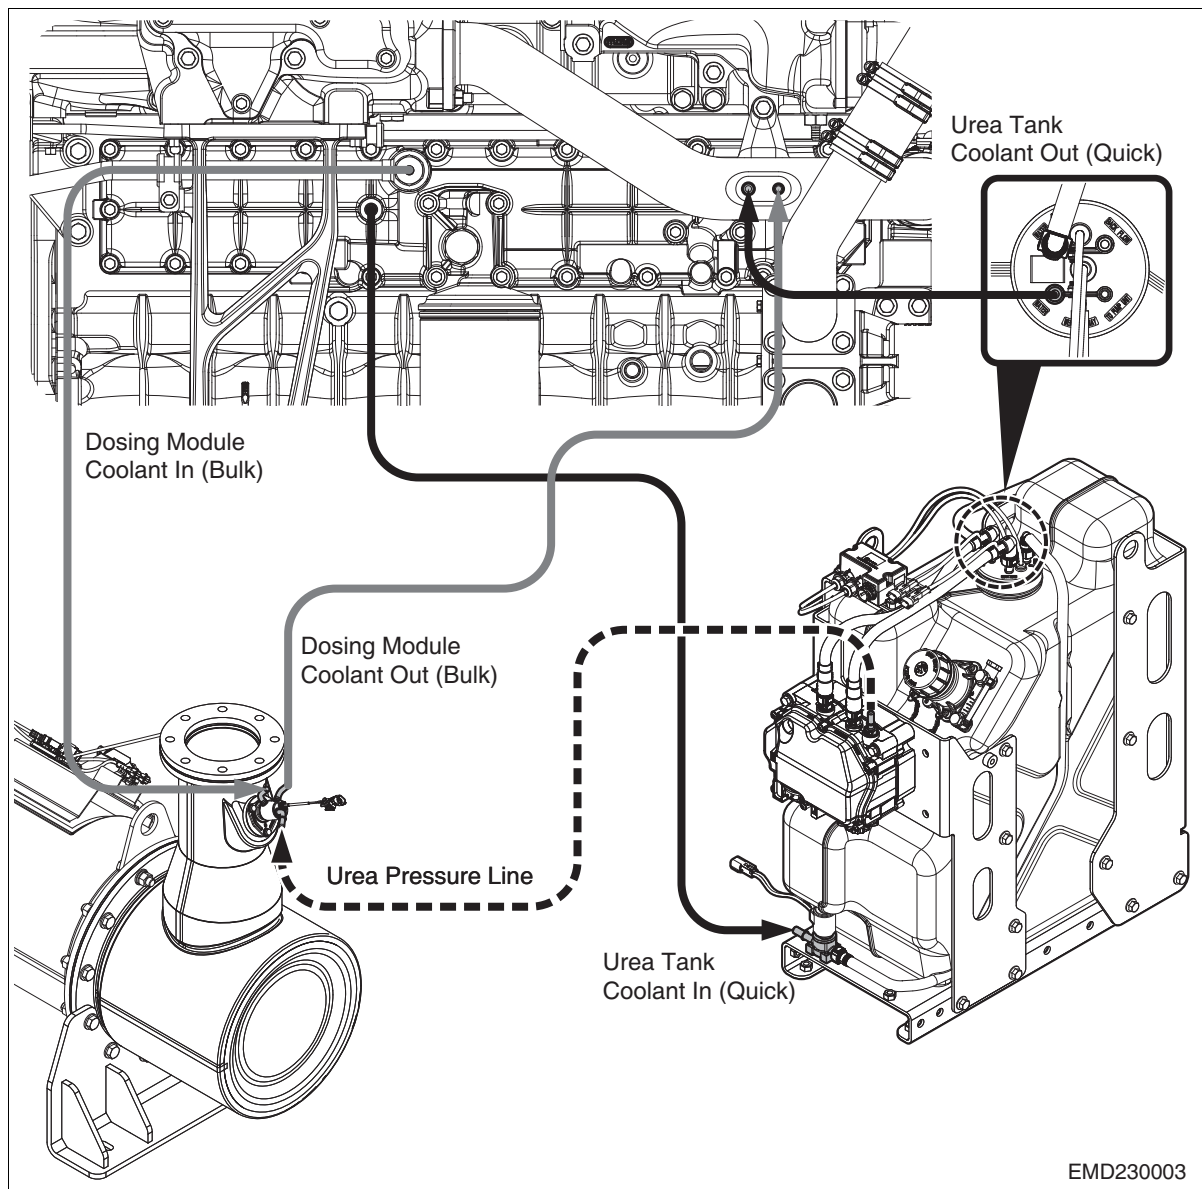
Urea Tank heating & Dosing Module cooling Hose connection (DL08)
